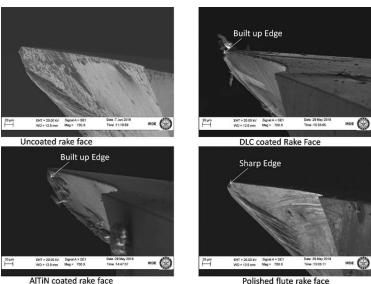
SEM images of cutting tools rake face after machining at 700X.
